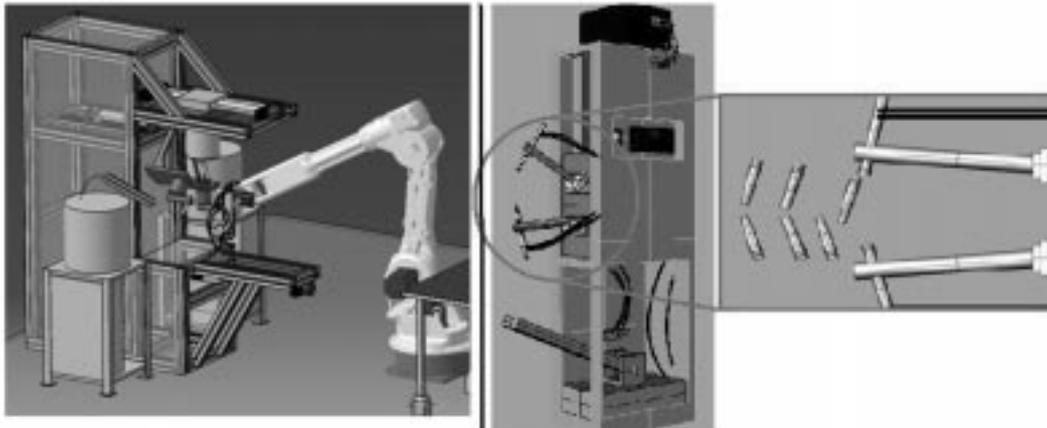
Equipment designed: a projection welding machine (left) and a spot welding machine (centre) with detail on its welding clamp and electrodes (right).
